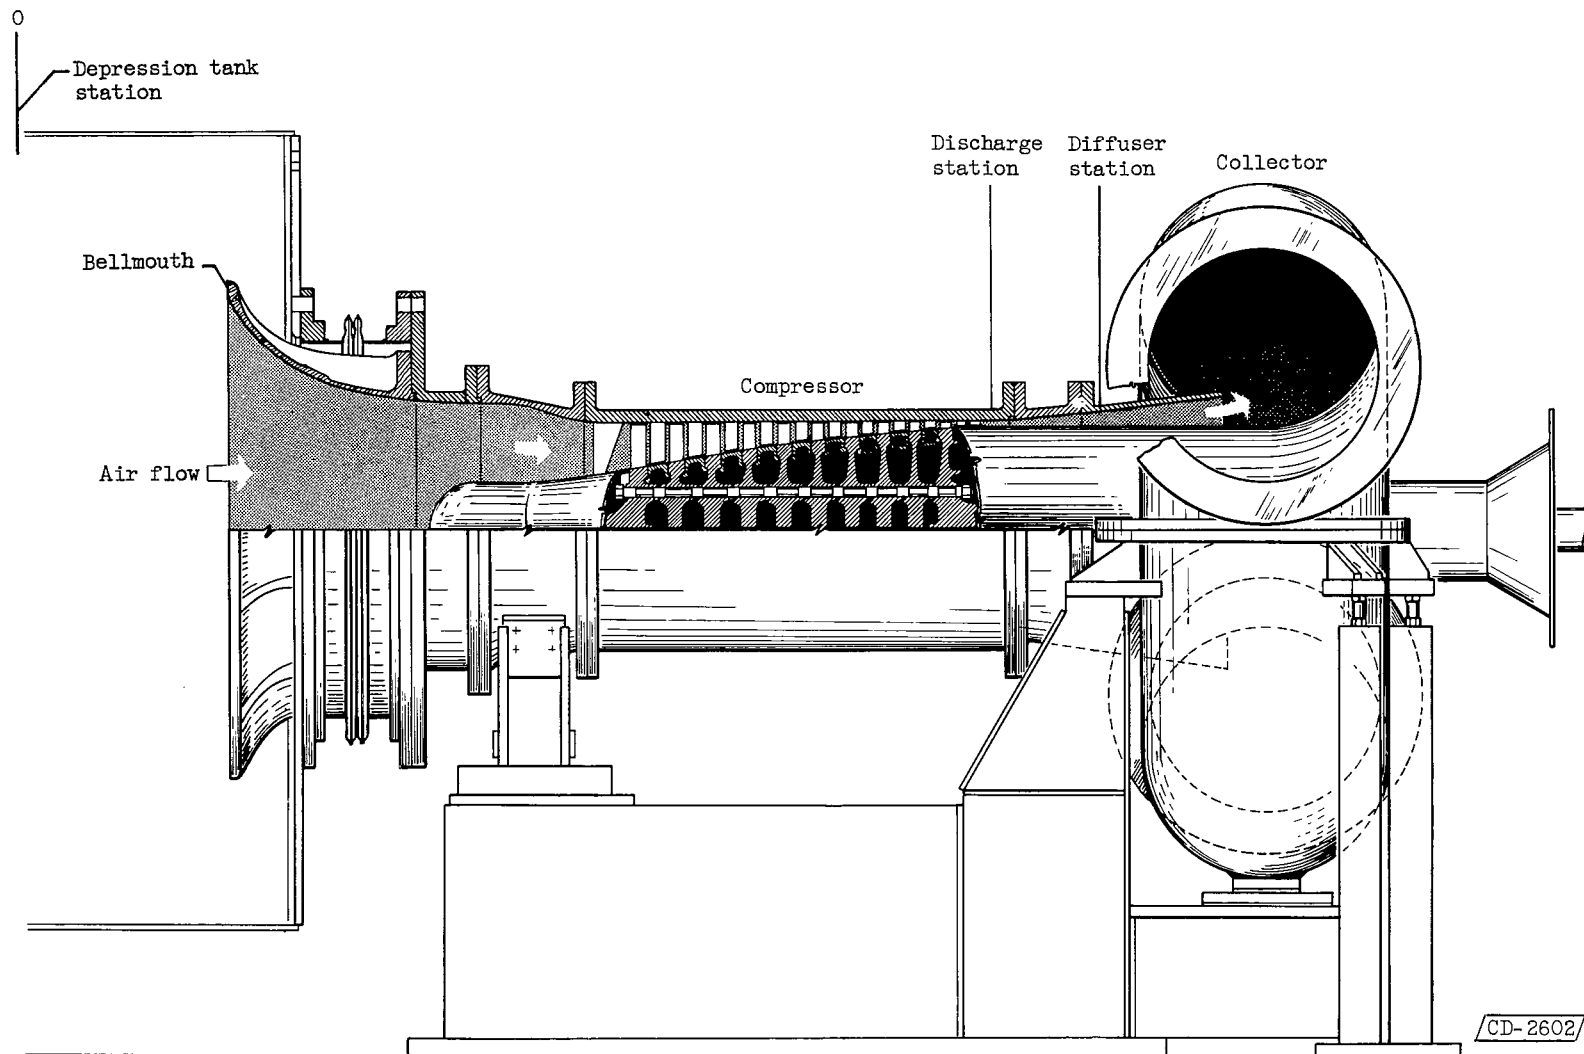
Cross section of 10-stage axial-flow compressor, inlet bellmouth, and discharge collector (ref. 25).
